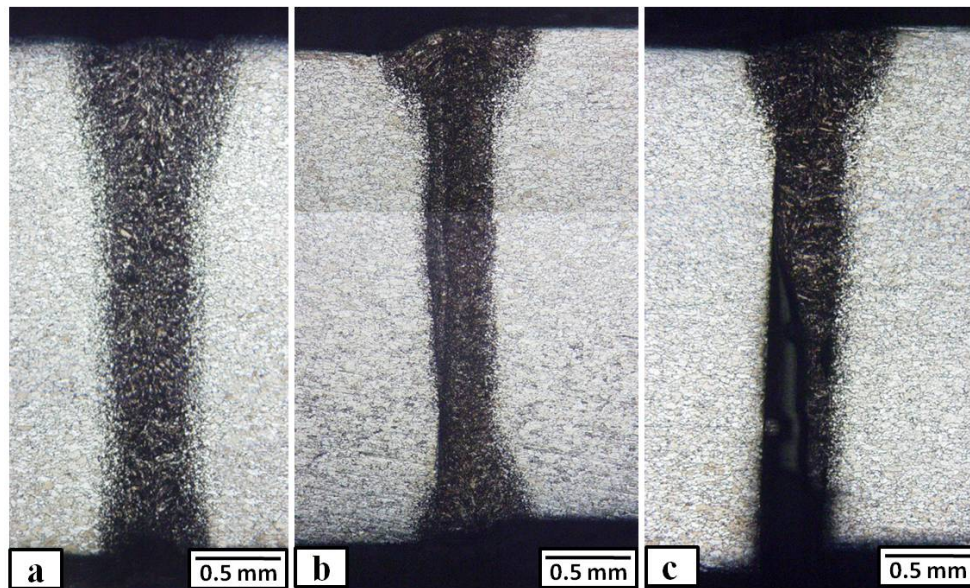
Macrographs of the weld cross-sections at different laser power, where (a) 2500 W, (b) 2000 W, and (c) 1500 W
